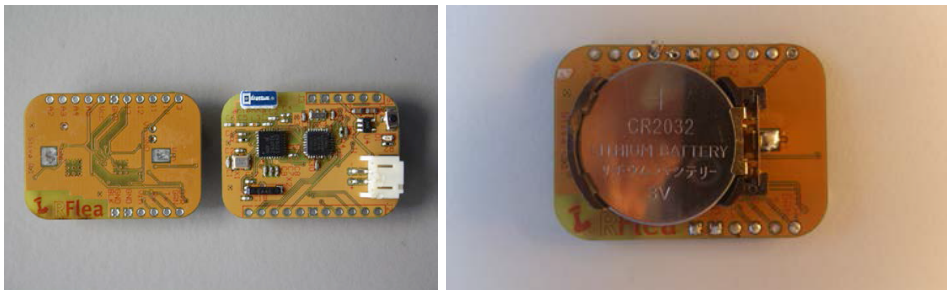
Left: rFlea view from the two sides of the board. Right: rFlea with a coin battery holder soldered on the back side.
